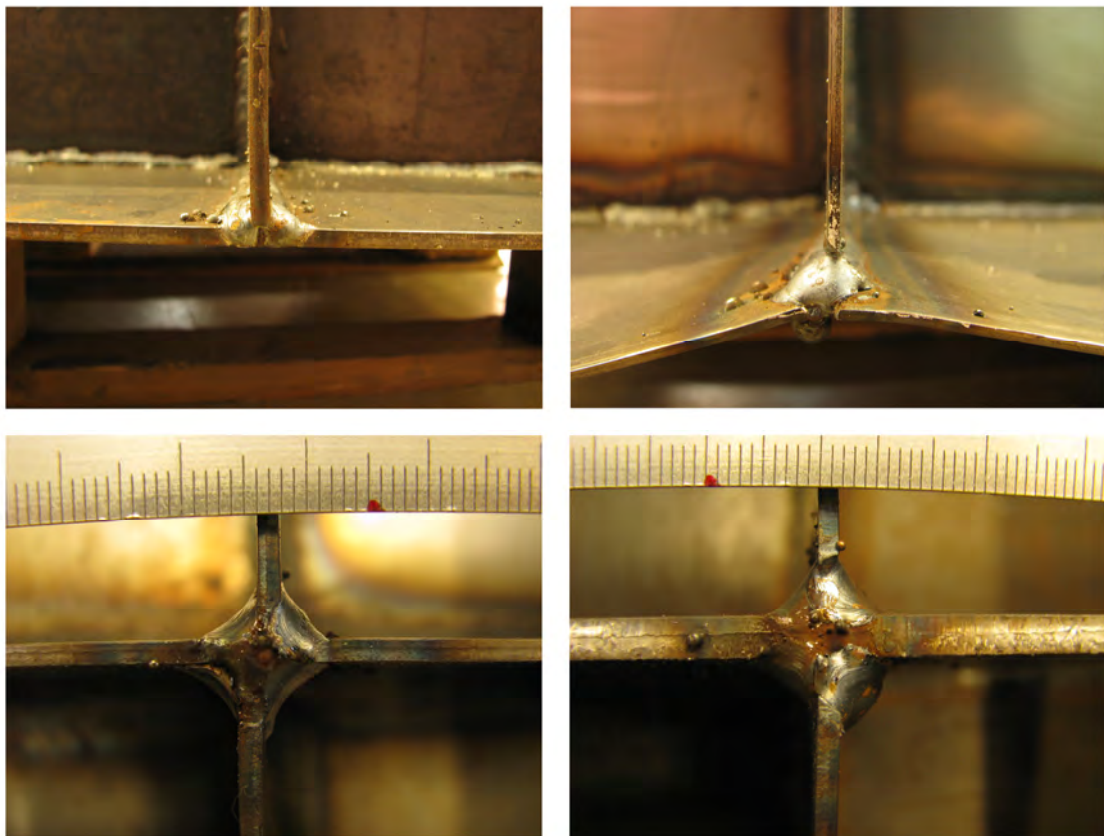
Close-up photographs of the tee- and cross-fillet welds in the manufactured panels.
